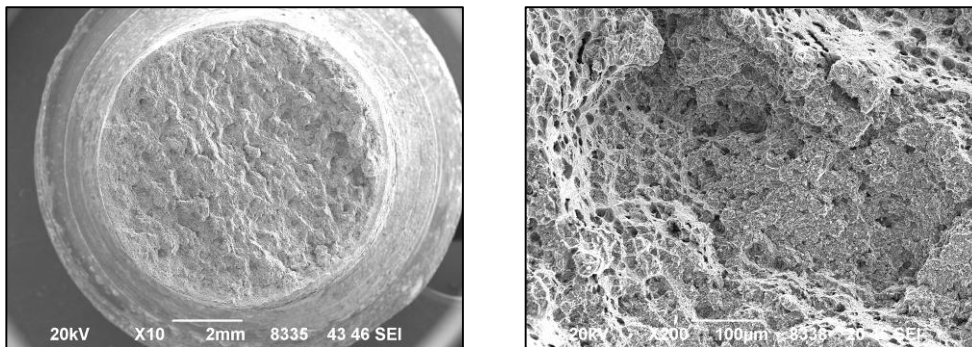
, 3b. Fracture surface of sample tested at 625 °C, 100 MPa, rupture of 6,661 hours.
